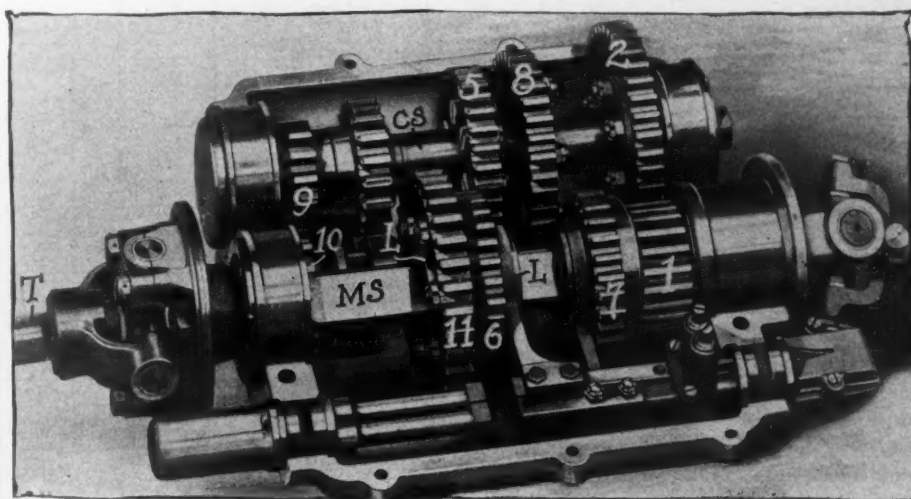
THE PIERCE-ARROW FOUR-SPEED GEARSET WITH TOP HALF REMOVED
